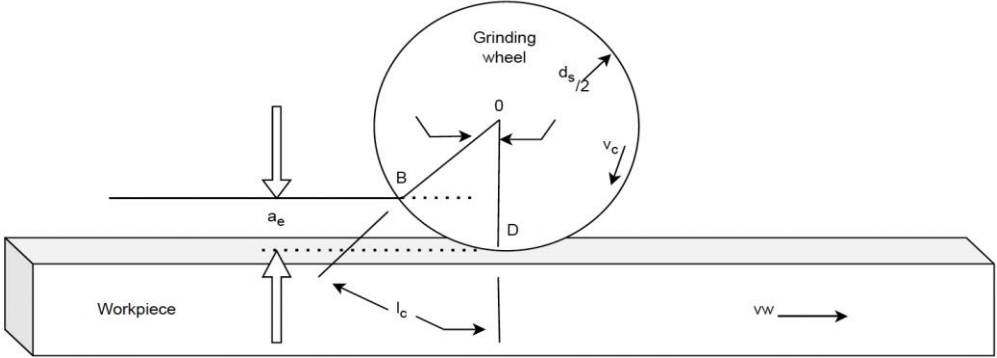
The Relationship Between the Workpiece and the Grinding Wheel in Surface Grinding.
